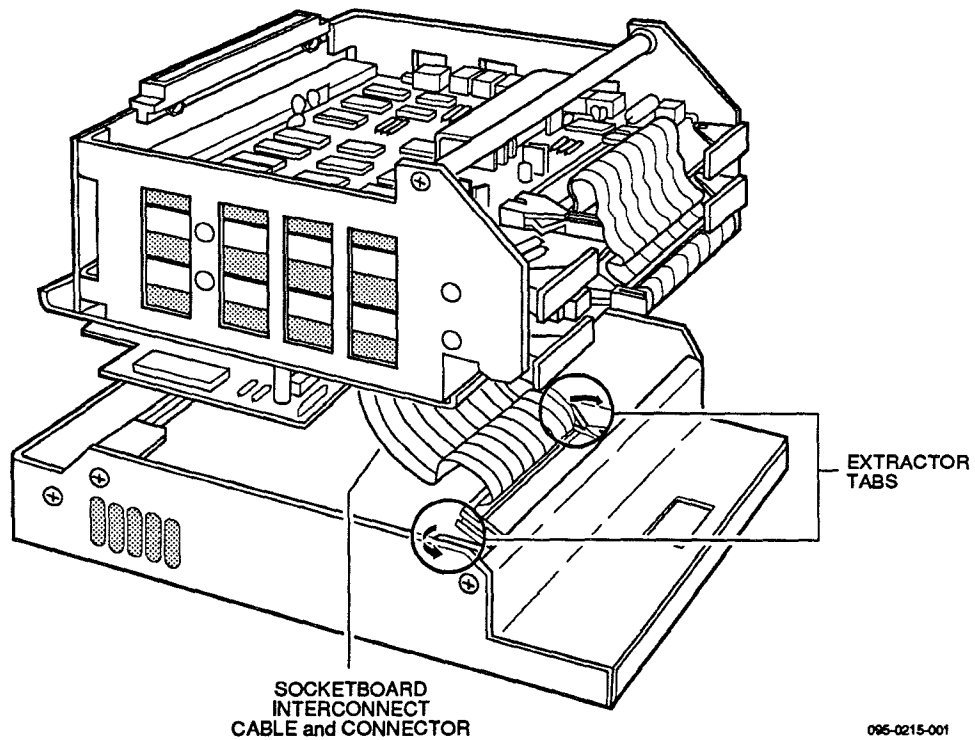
UniPak 2/2B Disassembly (UniPak 2 shown)
